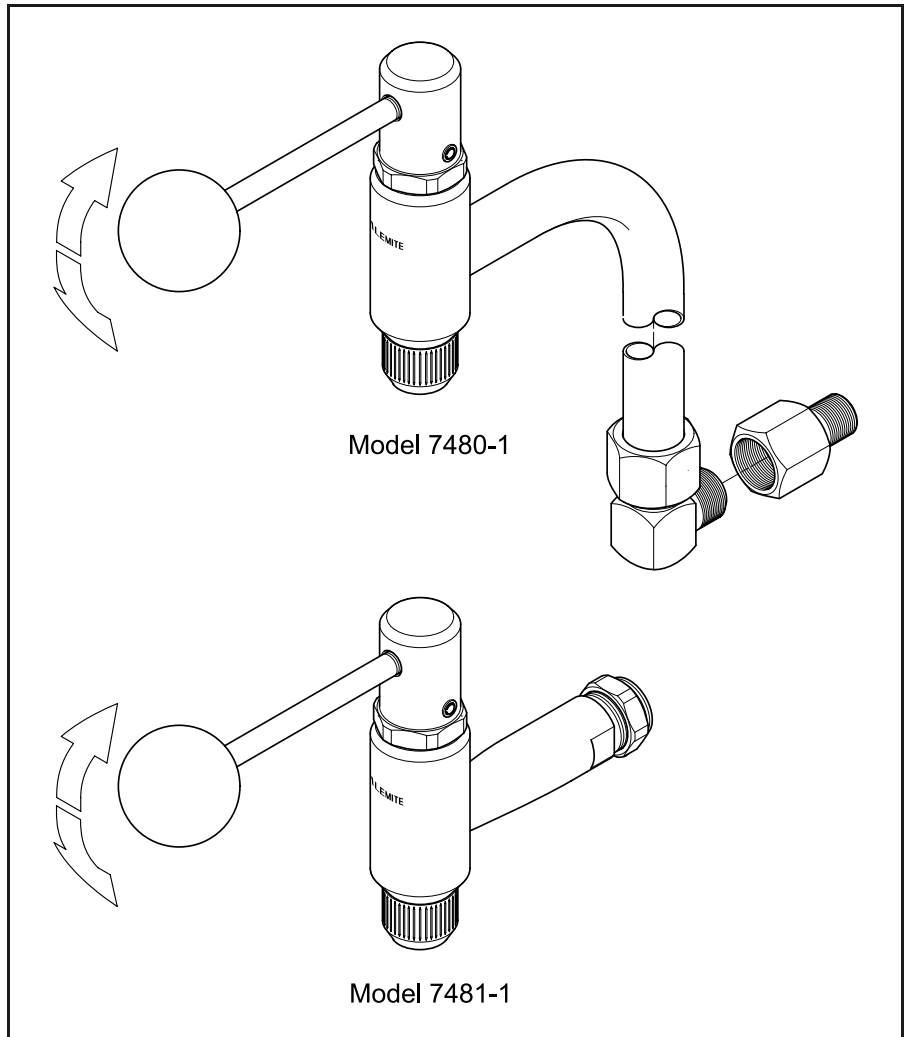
Dispensing Valve Model 7480-1 and 7481-1
